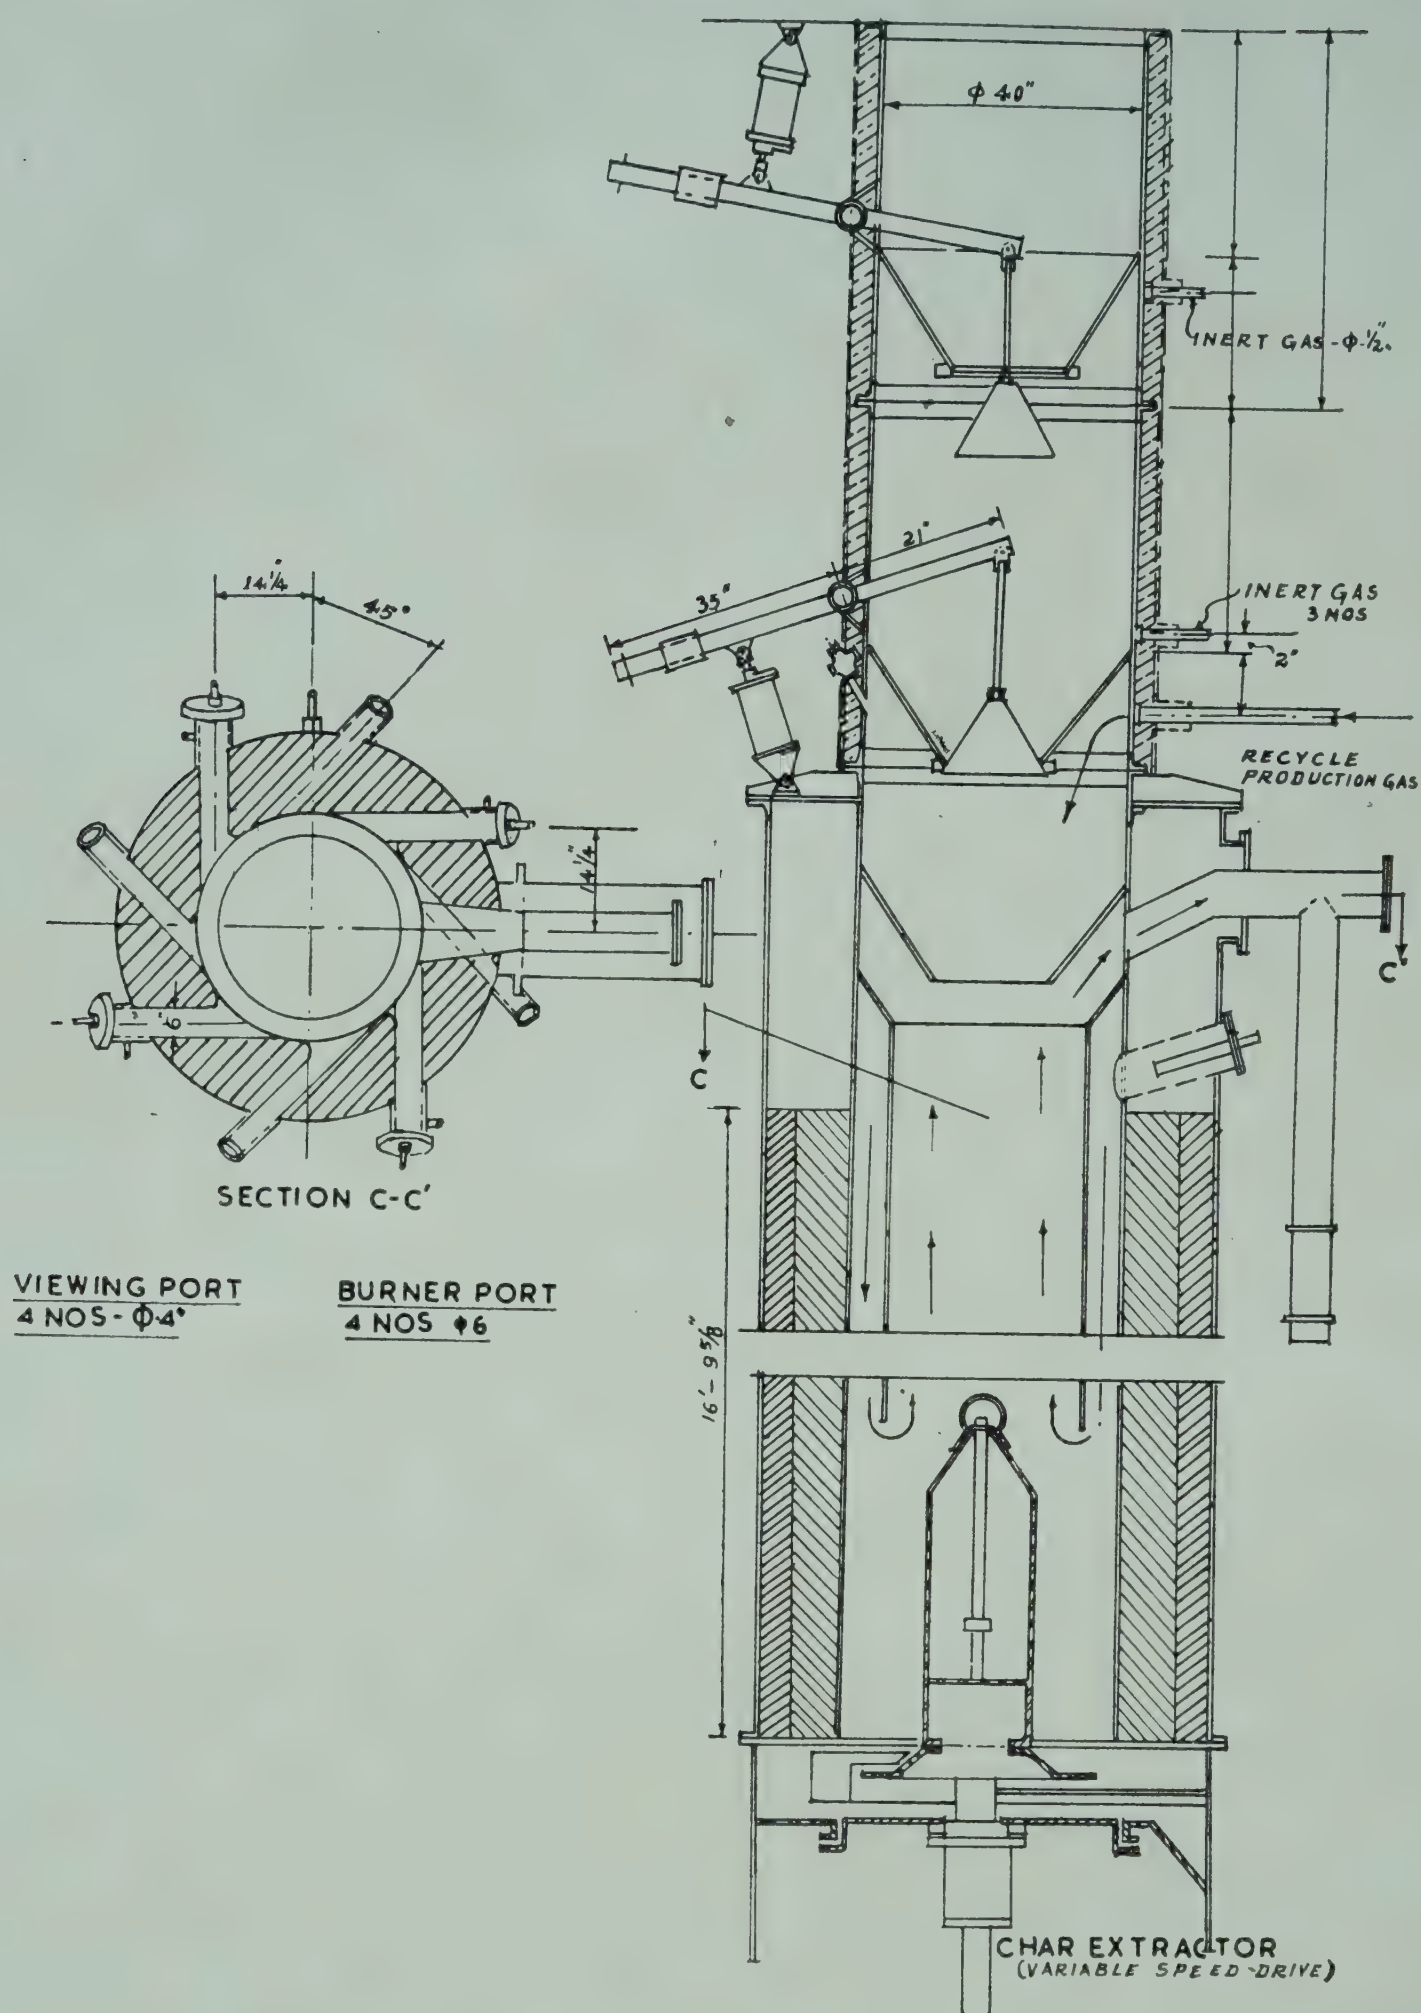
CARBONIZER ASSEMBLY AND MODIFICATIONS
